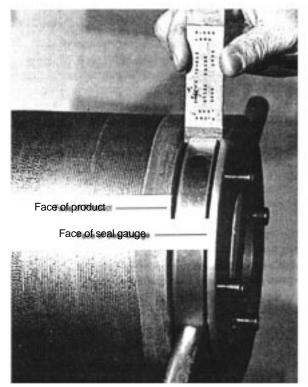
Extreme-Line Thread Plug Gauge Installed Hand-Tight and Seal Plug Advanced (Go-No-Go in Place for Measuring Seal Diameter)
